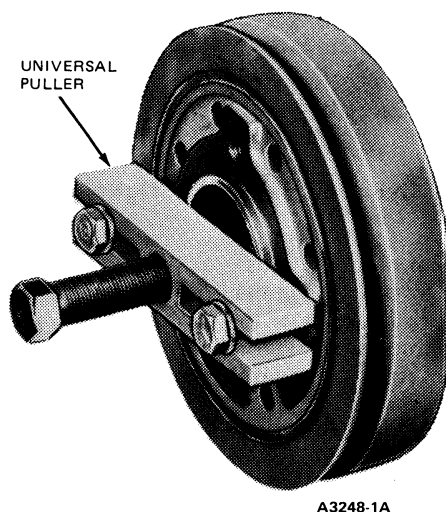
Crankshaft Vibration Damper Removal—F-100 and F-250, Bronco
